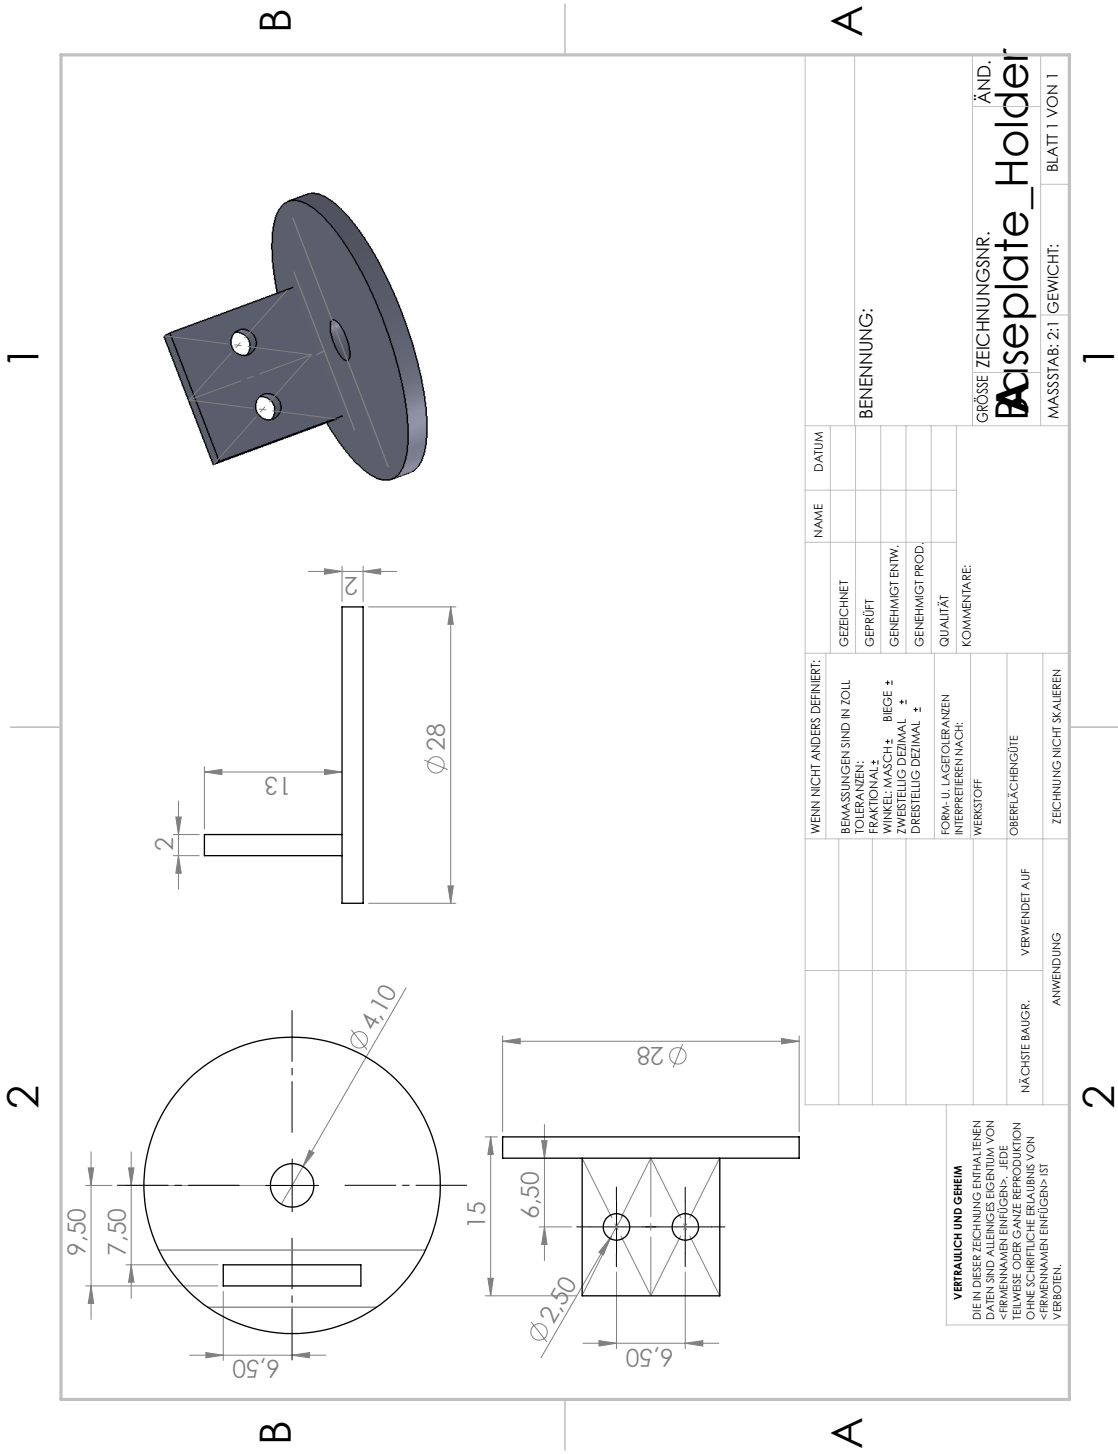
Dimensions of the baseplate at the bottom of the sample holder (c.f. Figure 8.4). The difference to the base plate of the first rod is that instead of the rectangular extrusion where the sample holder is screwed to, the sample holder has a small notch of the same dimension of 1 mm. The drilling in the centre is for the attachment of the outer screw which fixes the copper cap to the sample holder when everything is inserted into the cryostat.
